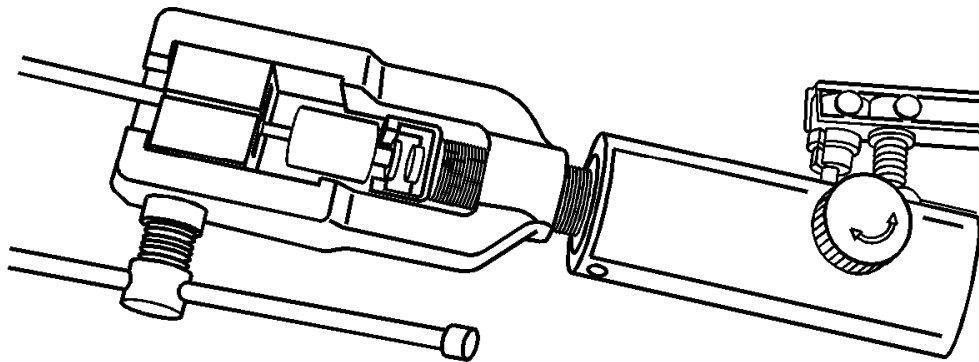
Rotating J 45405 To Bottom Against Die Cage
